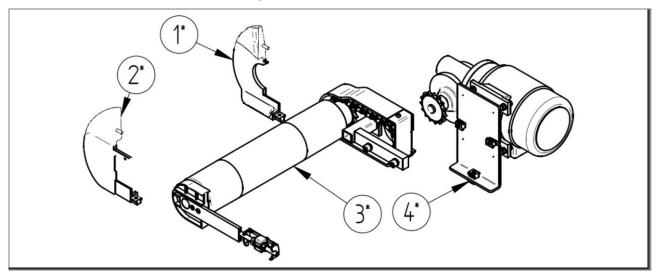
Parts list: External drive unit - position of drive unit 23 - ZZ.900.0143.00
